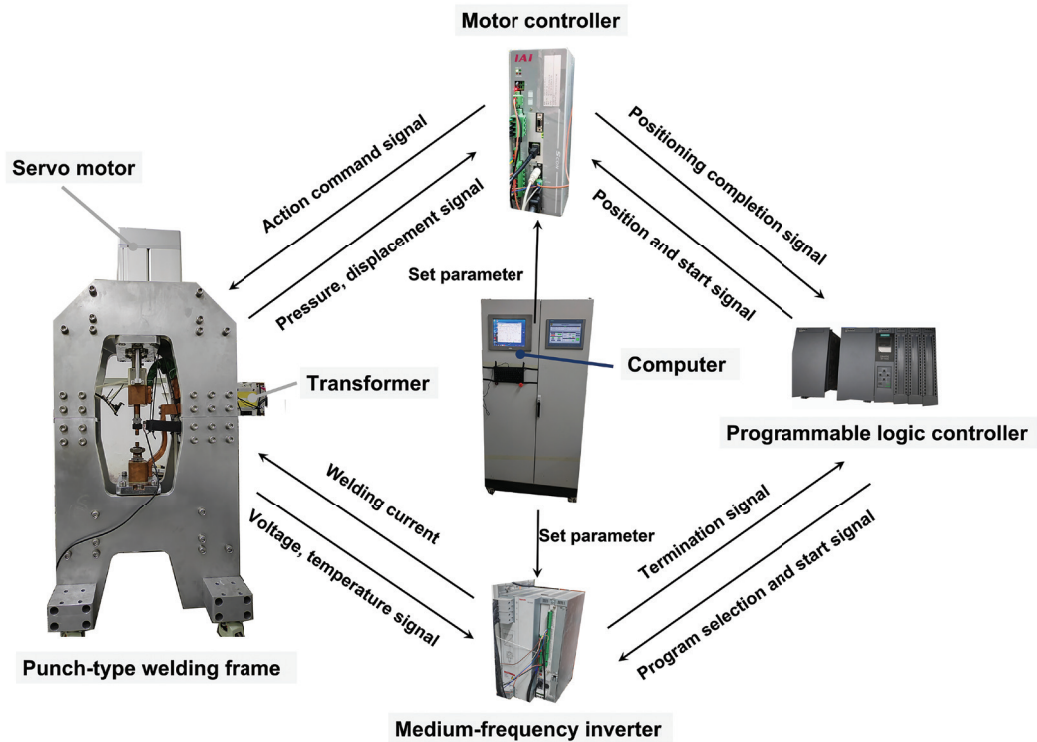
Schematic diagram of the RSW welding system.
